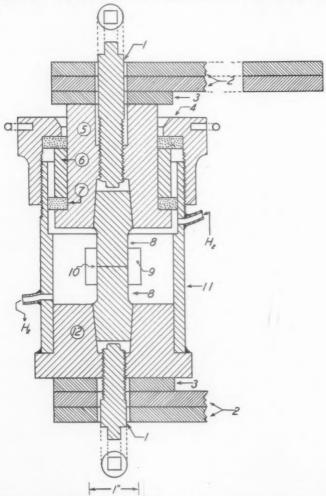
WELDING APPARATUS (DRAWN ROUGHLY TO SCALE).
